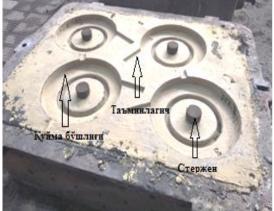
Sand-clay mold prepared for casting from liquid alloy
